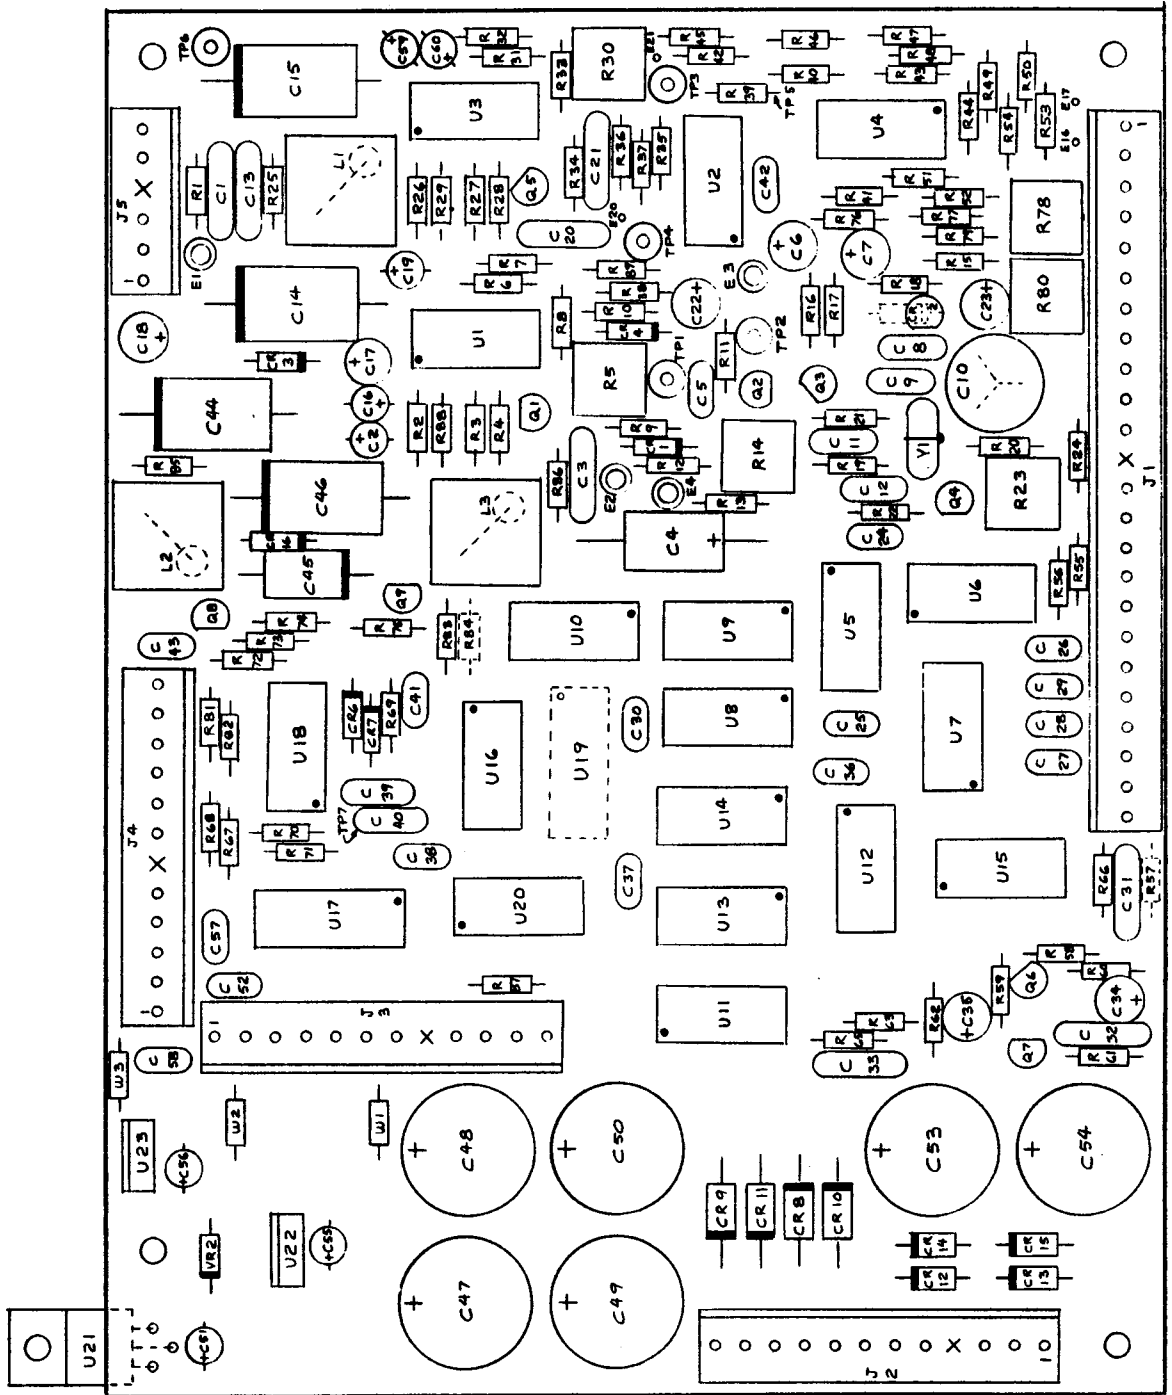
ASSEMBLY DRAWING A2 RECEIVER
